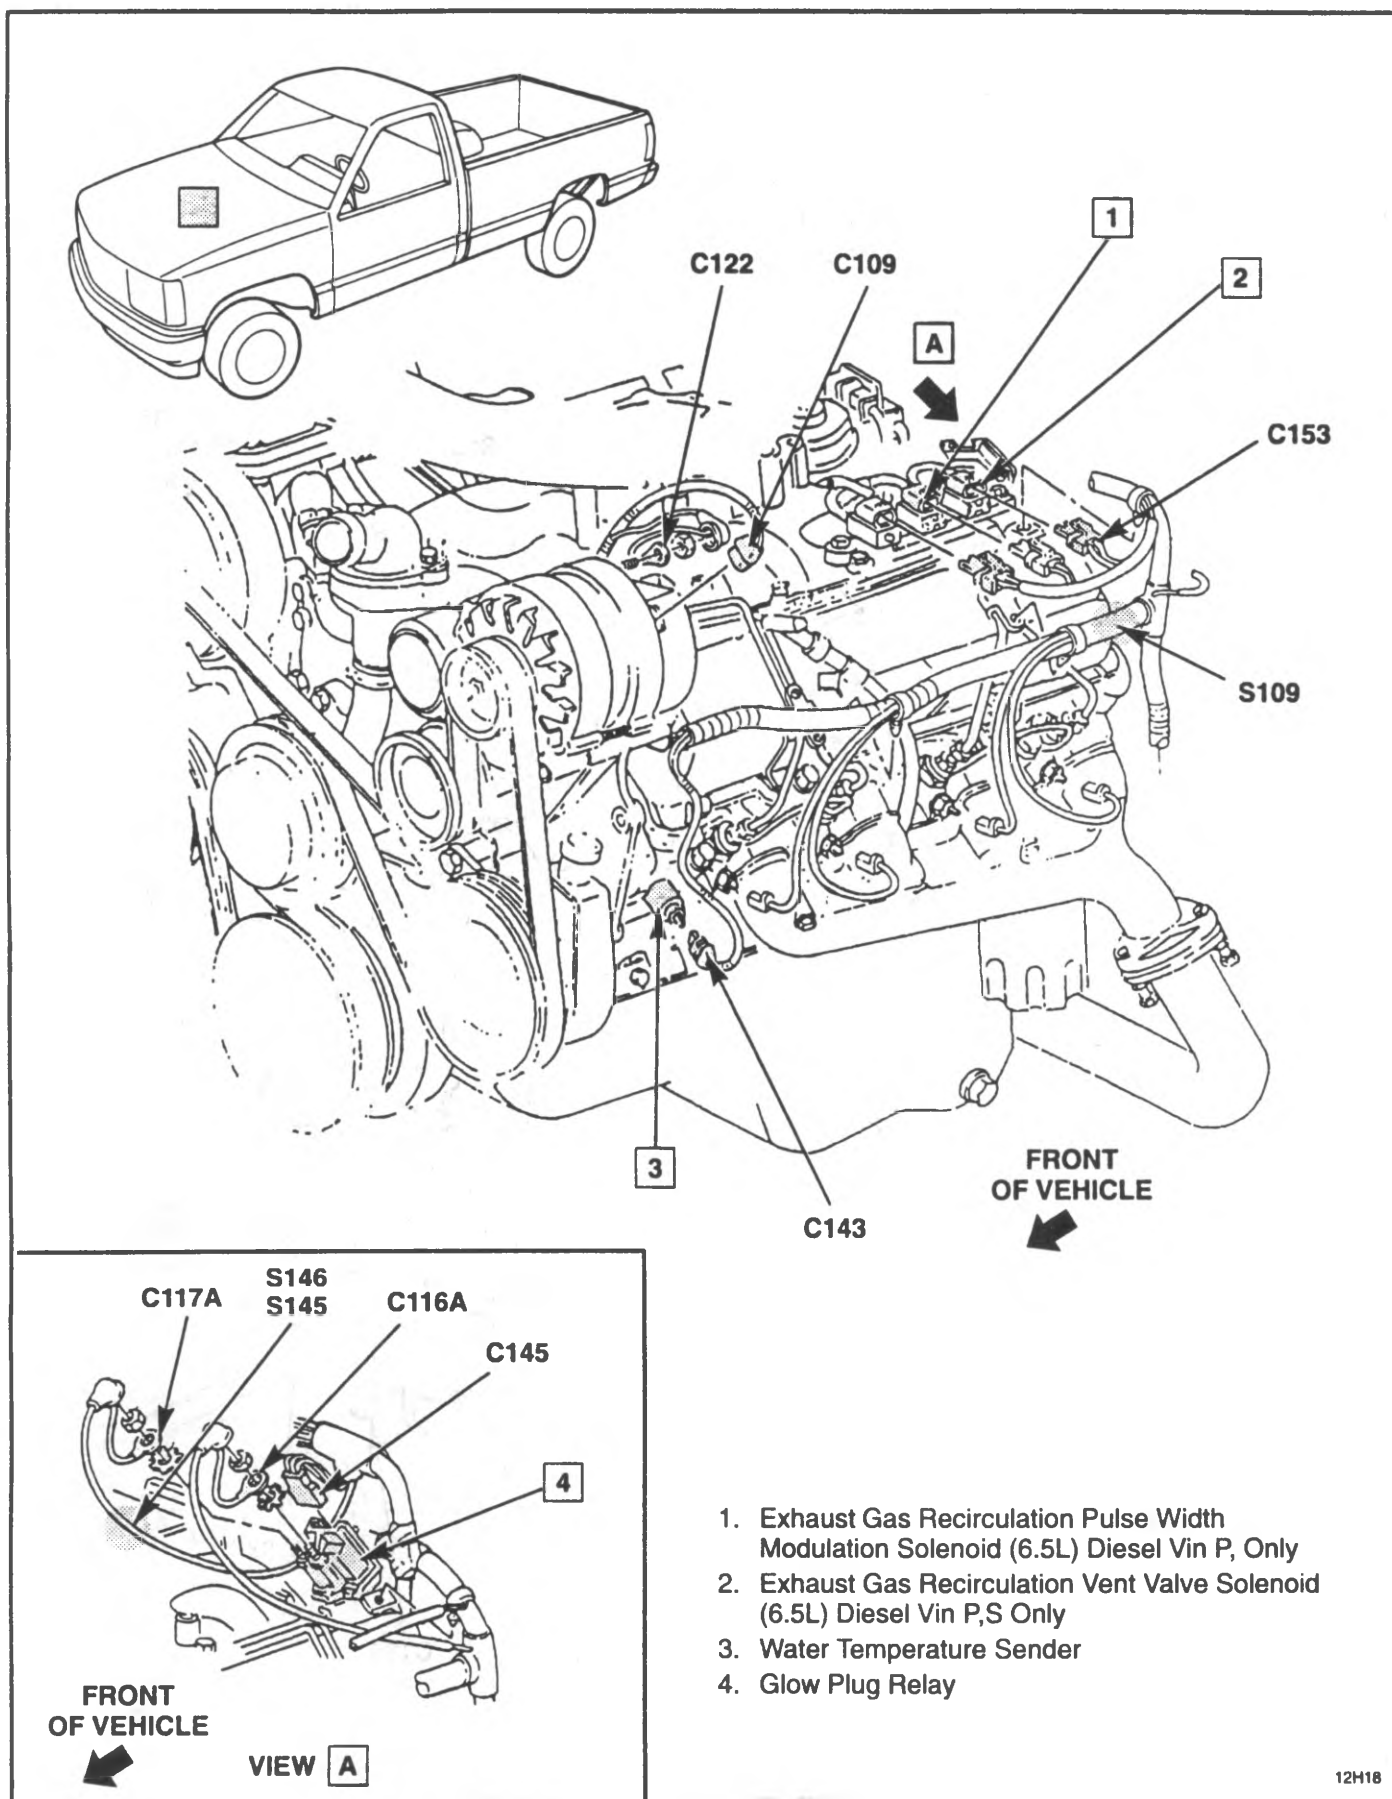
6.5L Diesel Engine Wiring, LH Side
